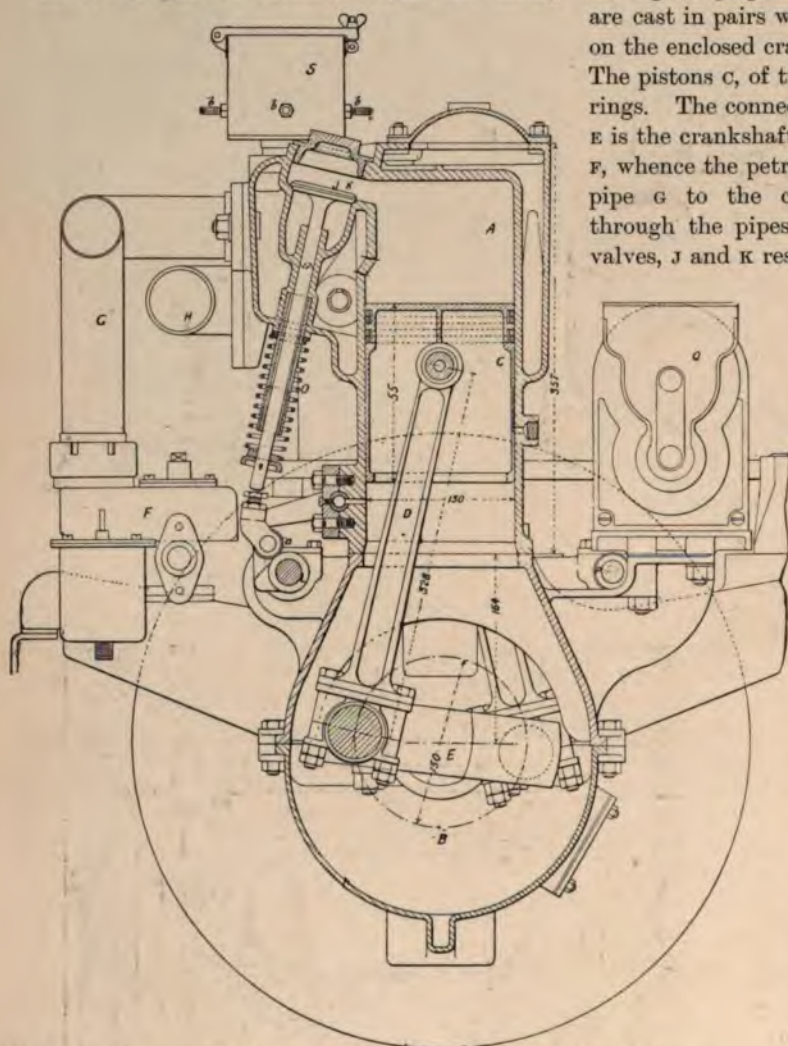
Daimler Engine. (Transverse Sectional Elevation.)
